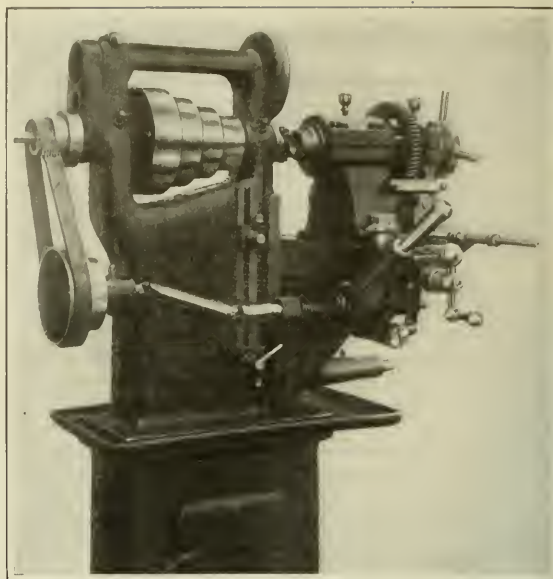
Side View of American Ammunition Co.'s Thread Miller set up on Hand Milling Machine
